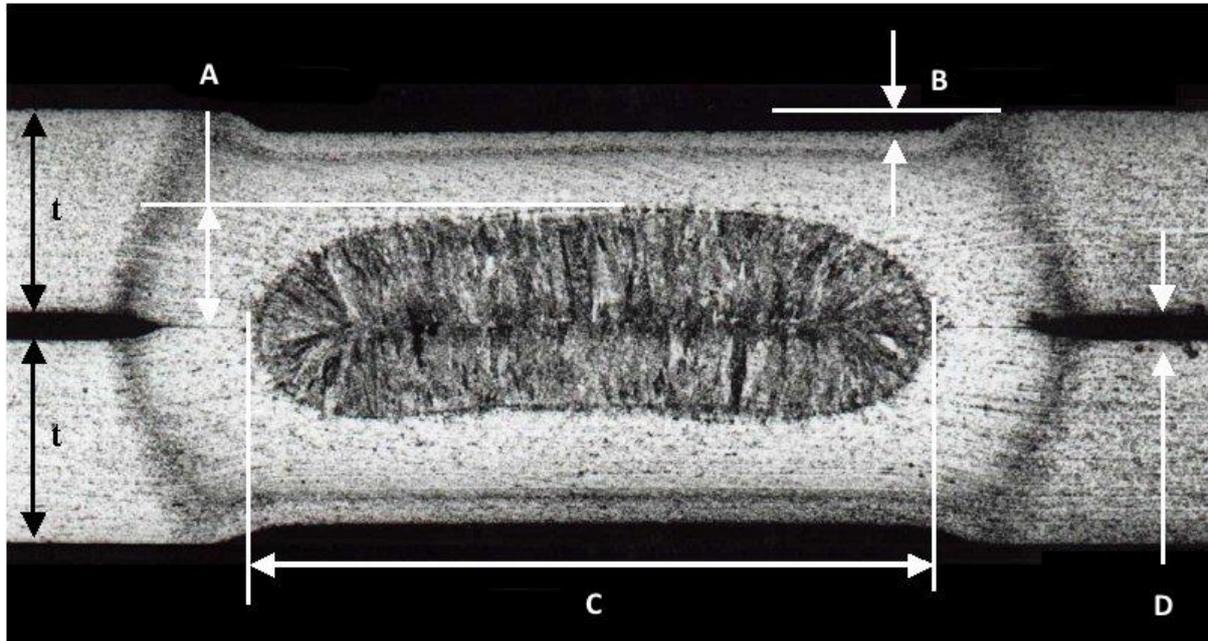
Cross section showing proportions of a good spot weld. Detailed requirements depend on application standard.
